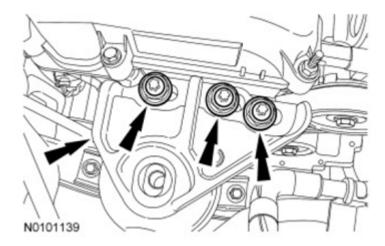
Locating Nuts And Engine Mount Bracket Courtesy of FORD MOTOR CO.
